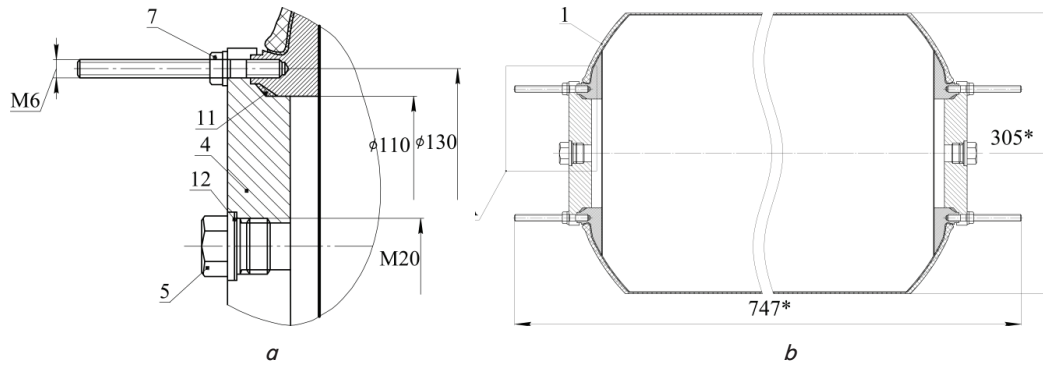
Finished product: *a* – a flange with a lid installed in the product; *b* – fuel tank
